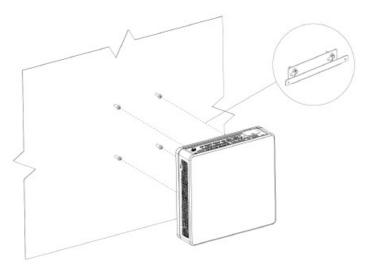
VEP1405 series wall mount bracket installation - cross-shaped cutout
